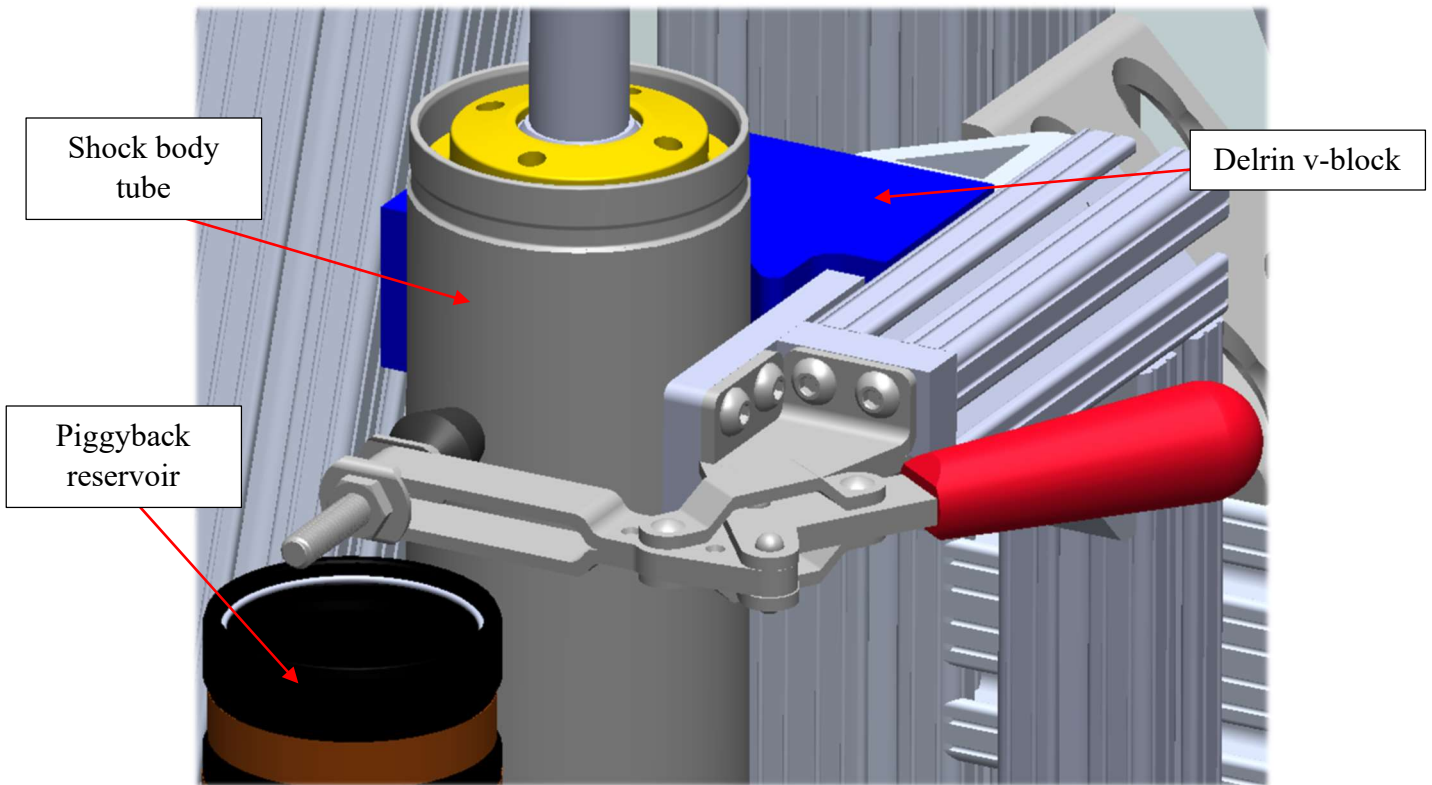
Upper fixturing Delrin jaw and toggle clamp
